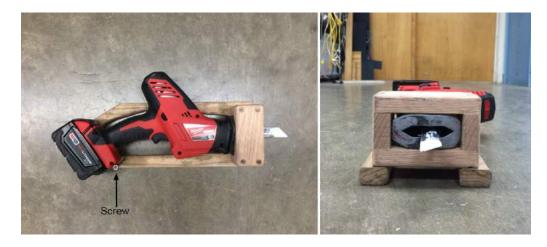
Saw with jig from a top side view (left) and from the front (right)
